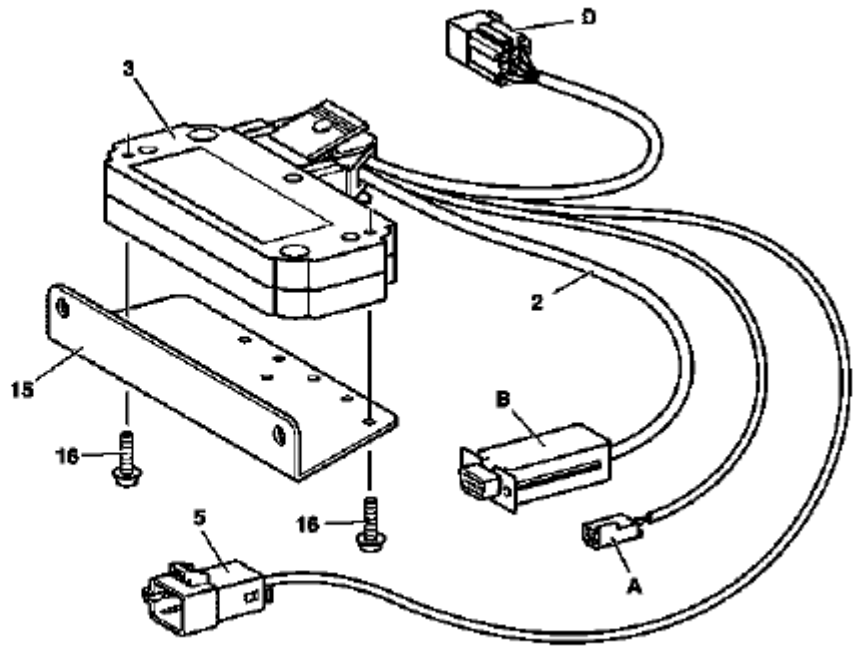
Identifying 126-Pin Socket Box (129 589 00 21 00)
